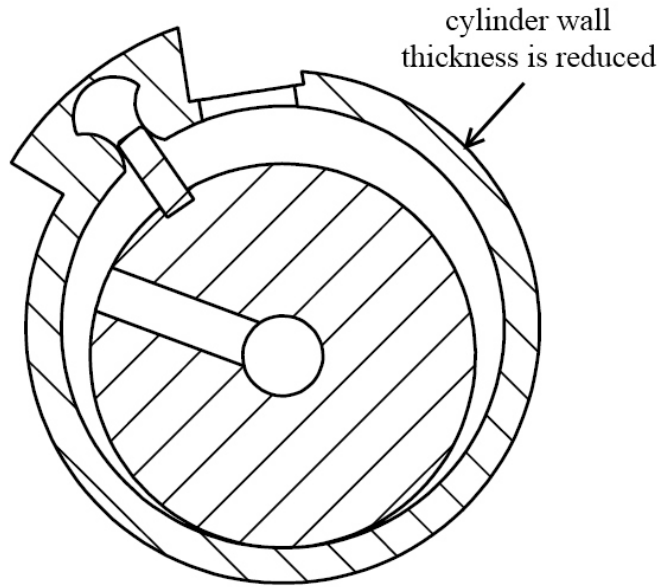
Fixed-vane revolving vane compressor with rotor drives and material removal
